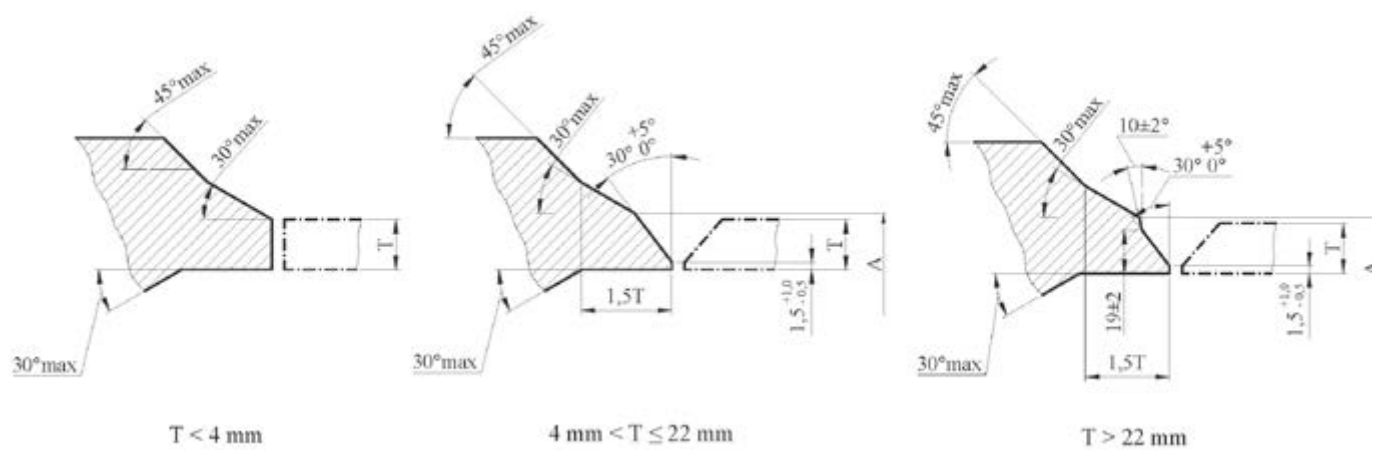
Form of the butt welding ends EN 12627
